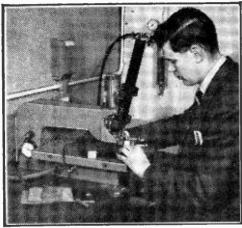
(Above).—Single head component insertion machine. Fig. 21 (Right).-Multiple head machine.
